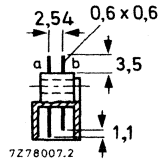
Straight dip-solder pins, with protruding earth contacts.
